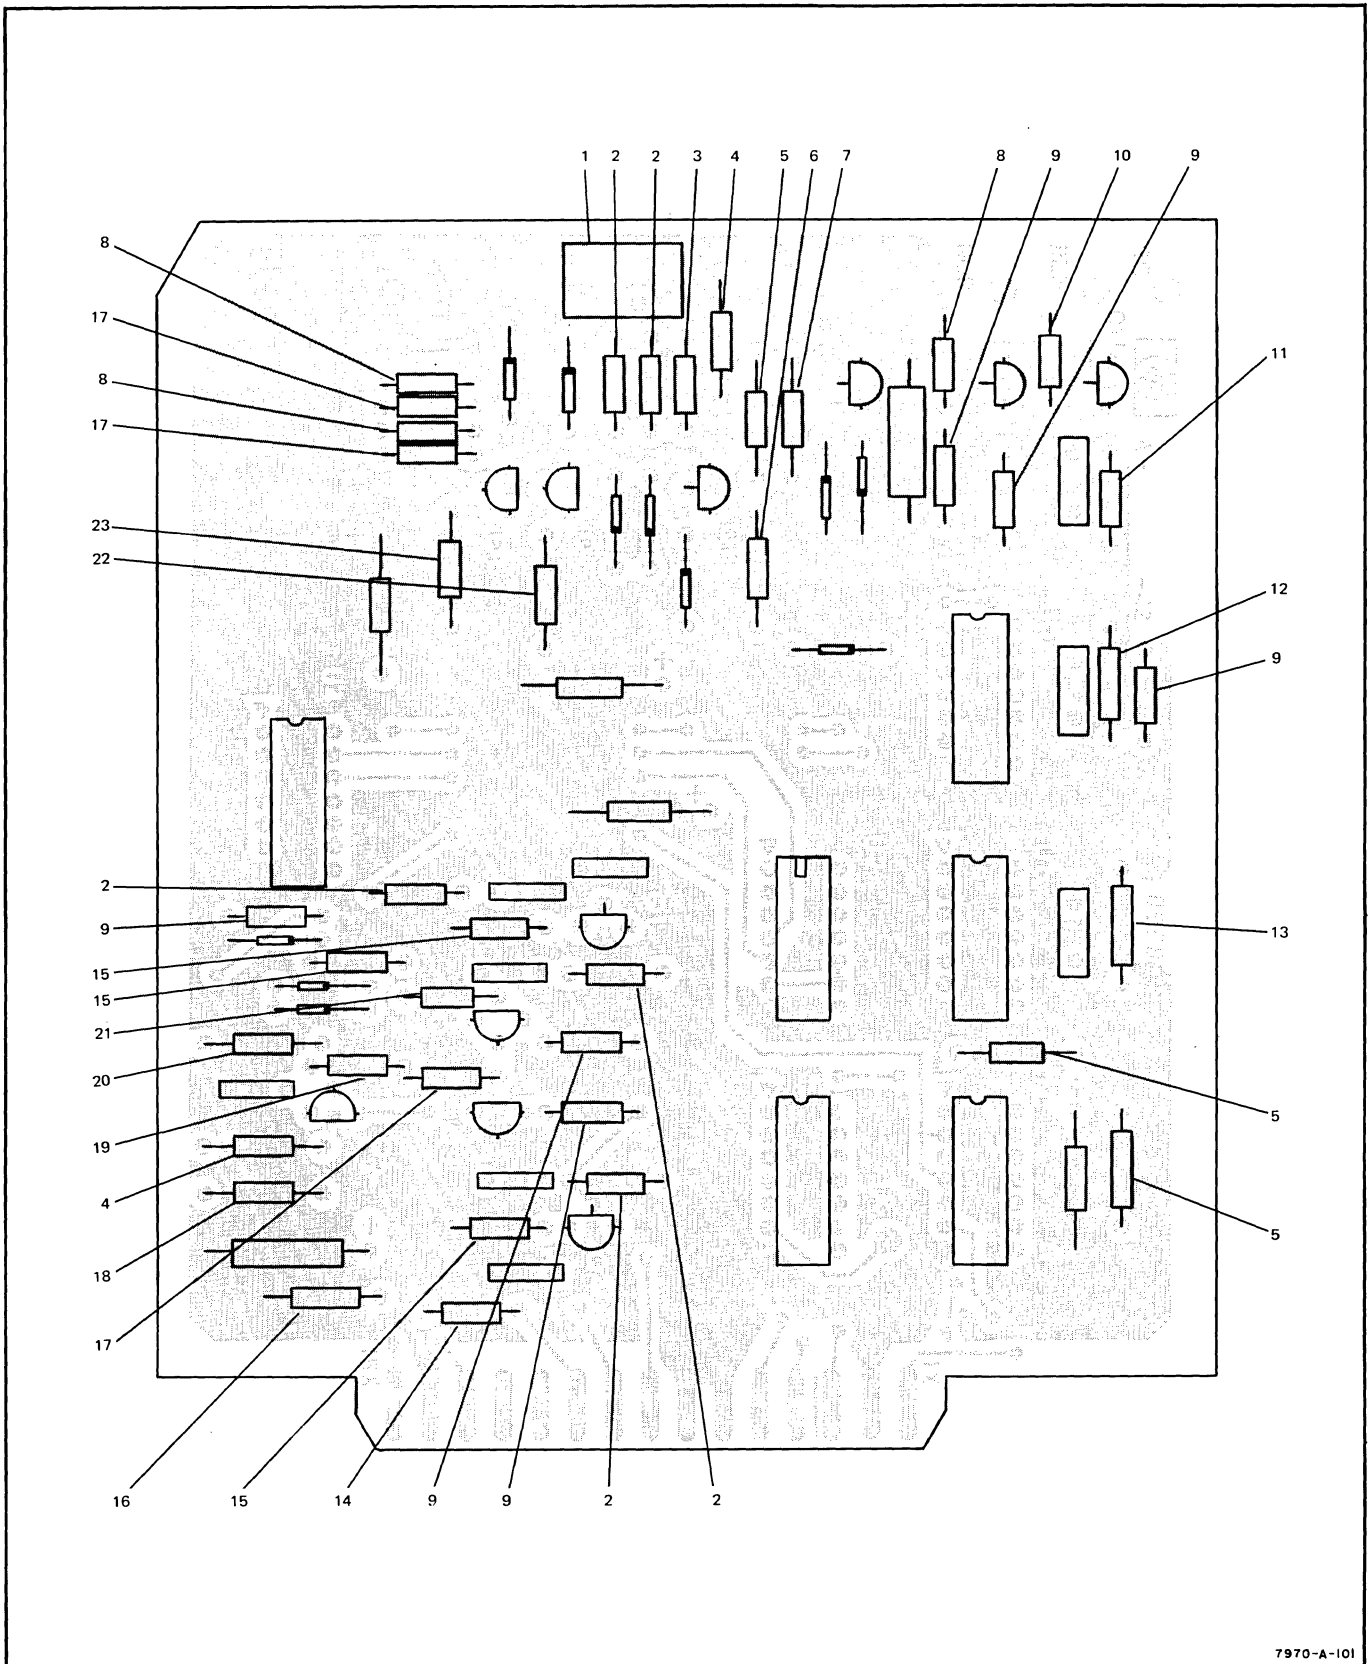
Read/Read Control PC Assembly A18A1 (Sheet 1 of 2)
